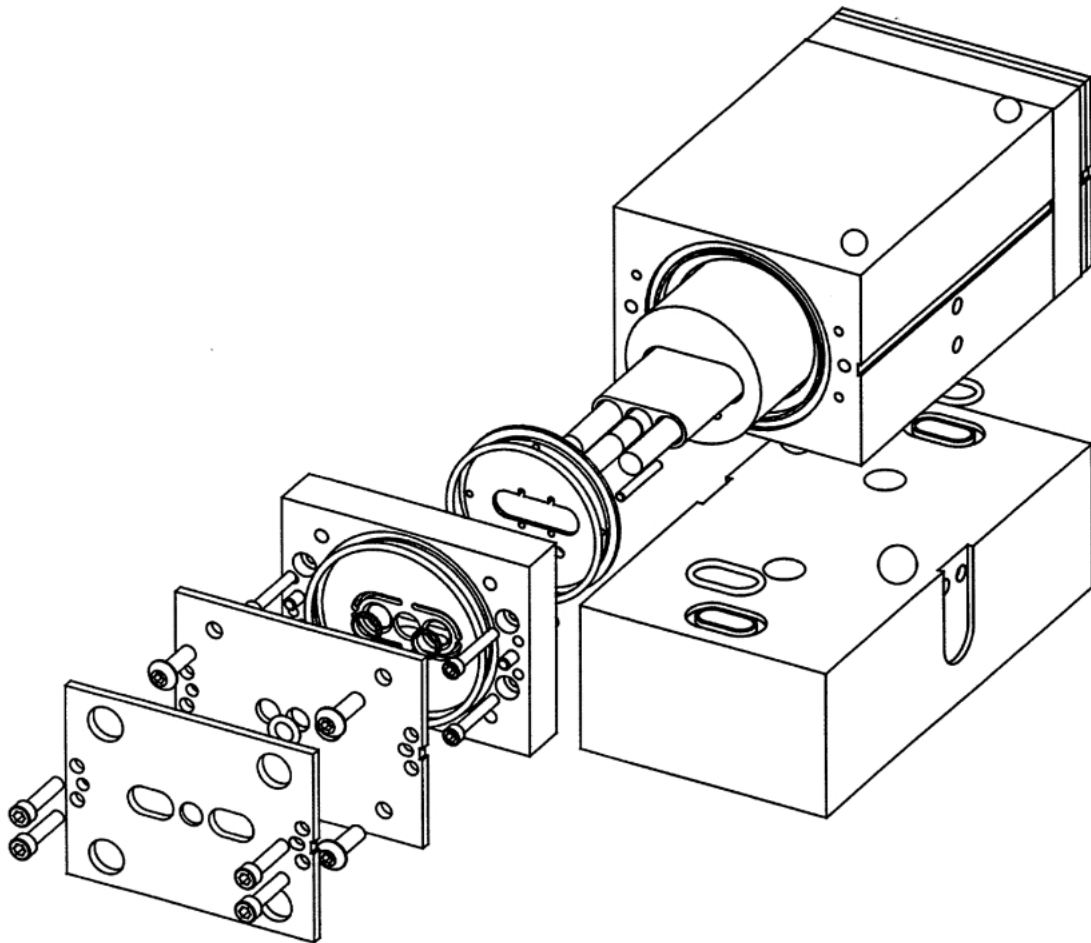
Exploded View of the POT Assembly and the POT Manifold
